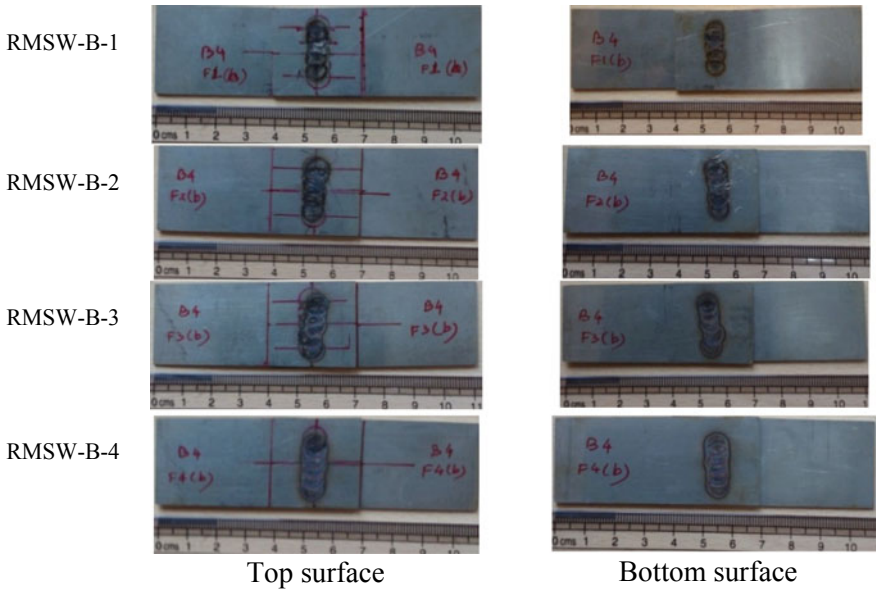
Photographs of resistance multi-spot welded samples of SS316 of 0.8 mm thickness
